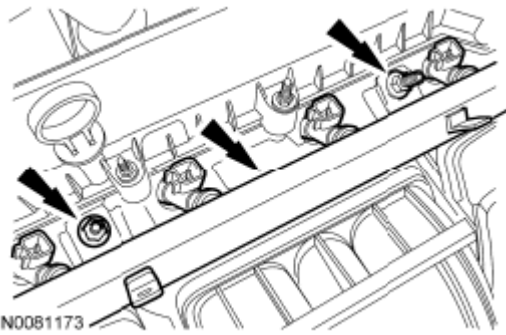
Locating Stud Bolts, Fuel Rail & Fuel Injectors
